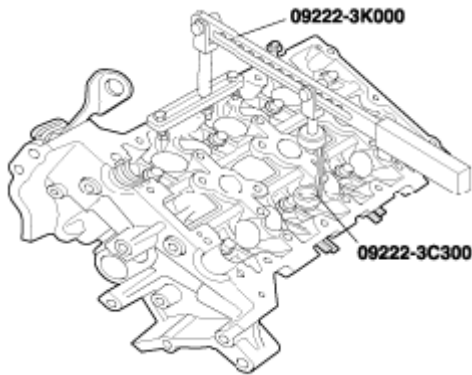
Compressing Valve Spring & Removing Retainer Lock
